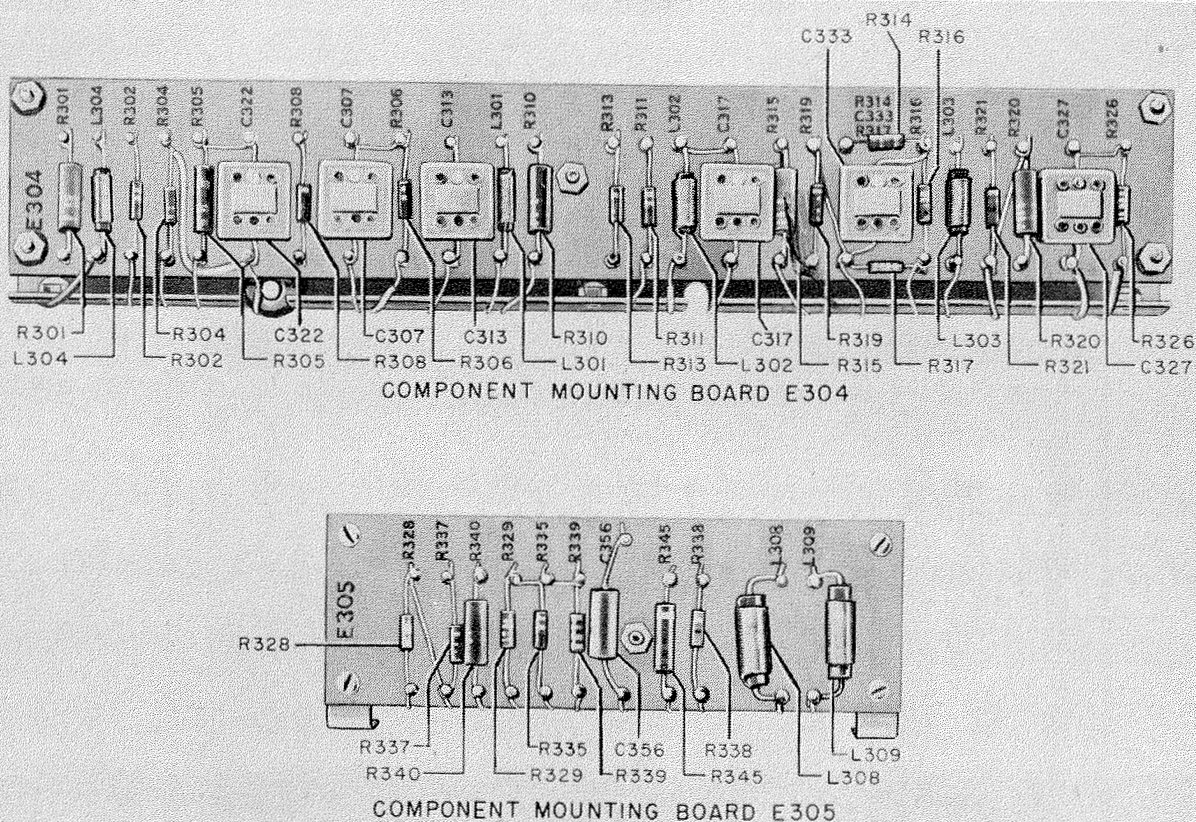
Radio Receiver R-361/GR, Location of Electrical Parts on Mounting Boards
